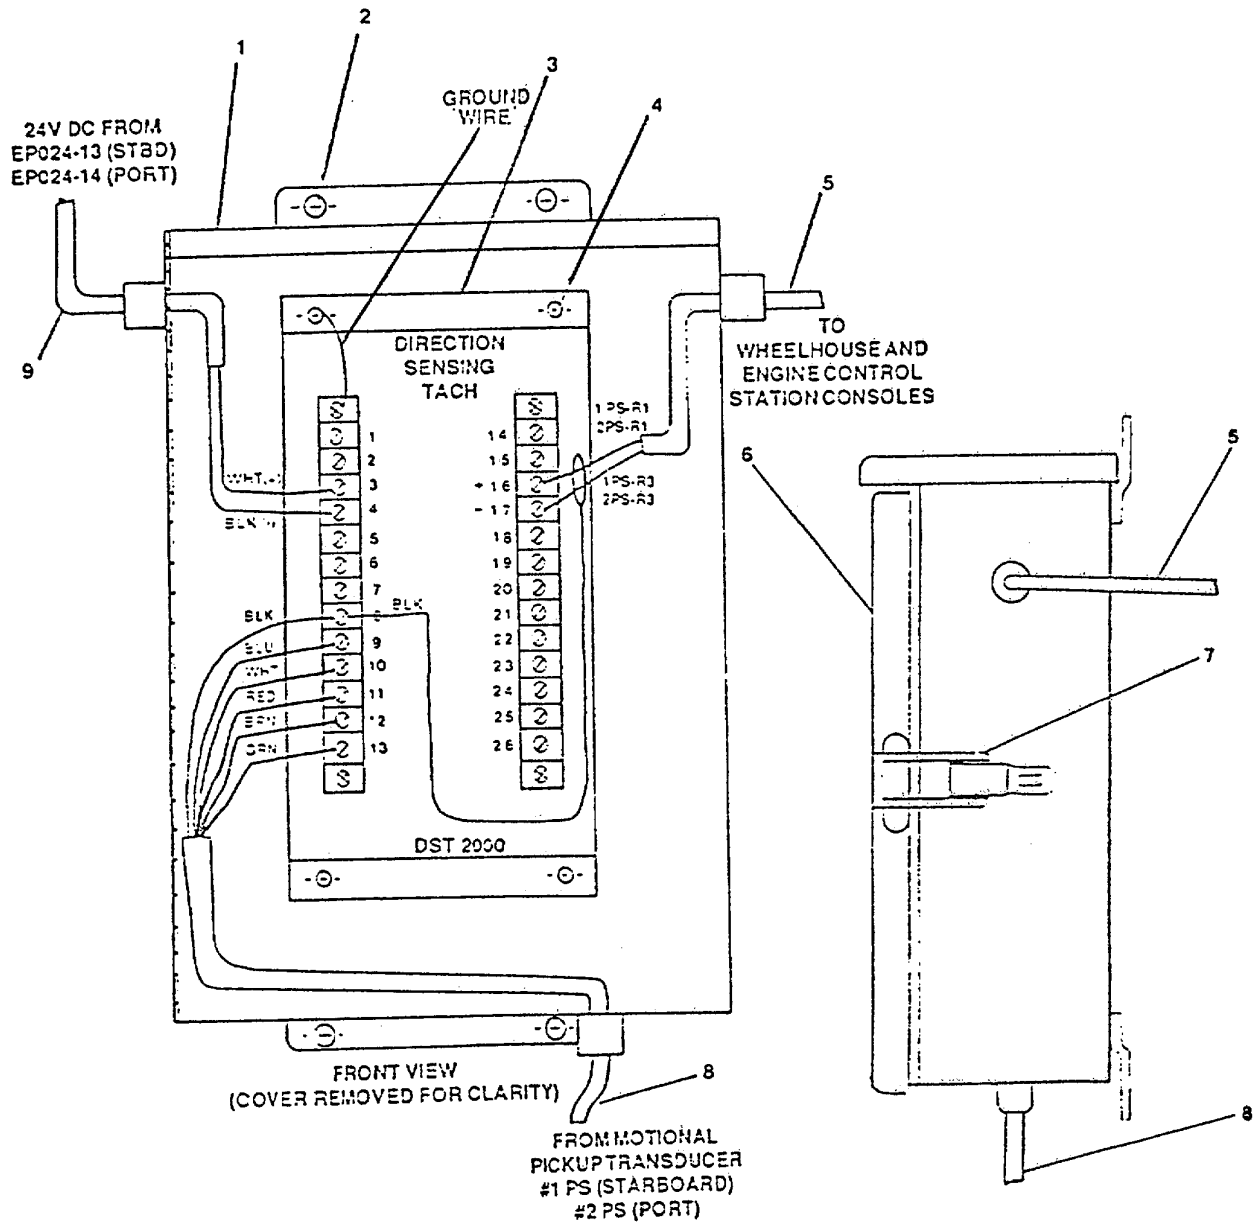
Electrical Self Generating (Shaft) Tachometer.
